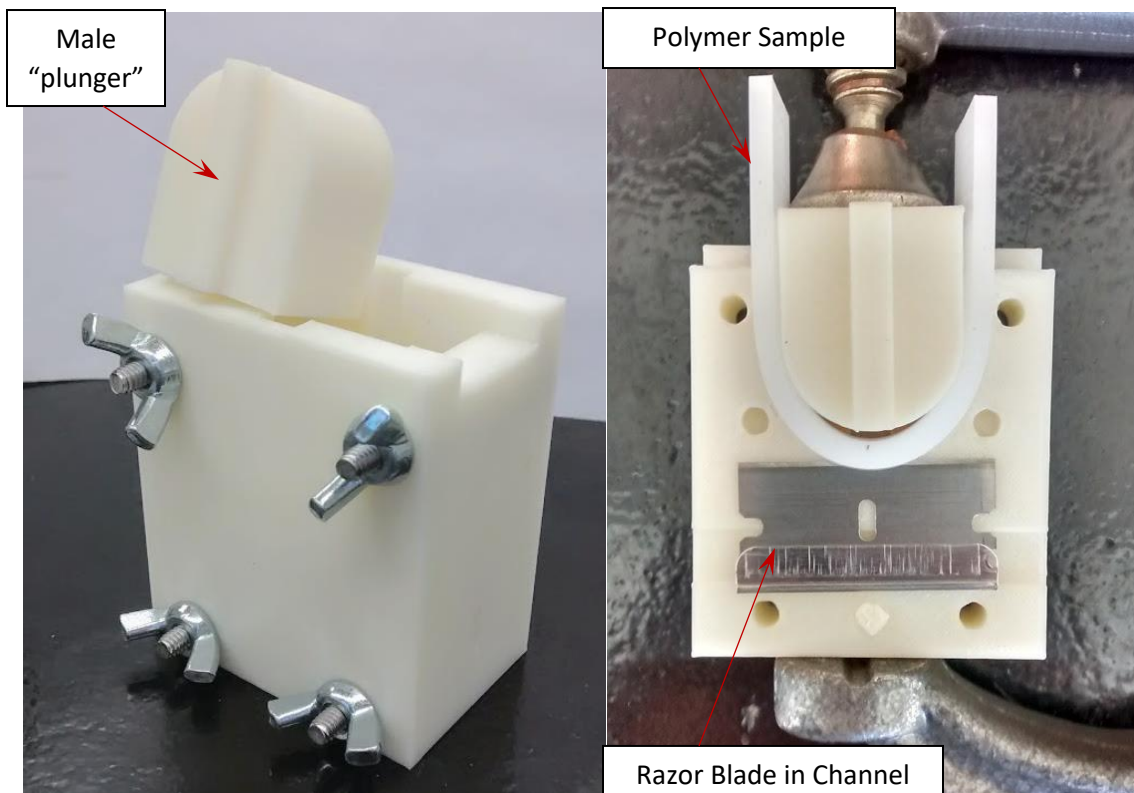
Notching and bending device. A photo of the assembled unit is shown to the left with the male plunger highlighted whereas a cross-section is shown on the right with bent sample and razor blade in place.
